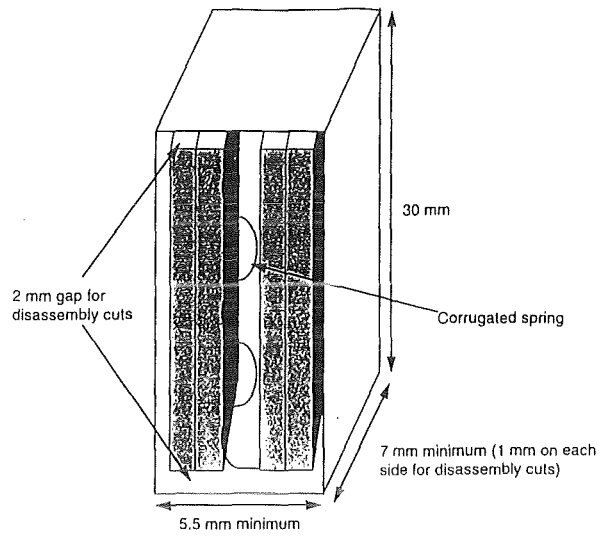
SS-3 miniature sheet tensile specimen packet (4 specimens per packet). Packet wall thickness = 0.5 mm.
